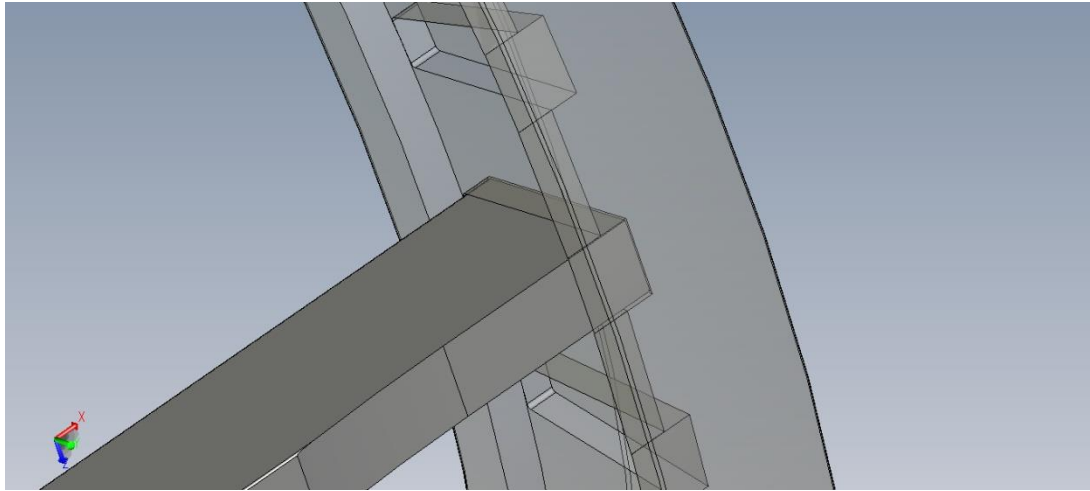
2D Schematic of the Rotor Bar and Rotor End Ring Connection of the Actual Motor
